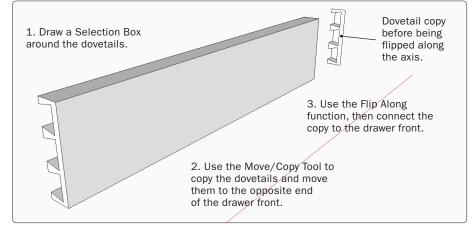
Copy the half-blind dovetails to the other end of the drawer front.
